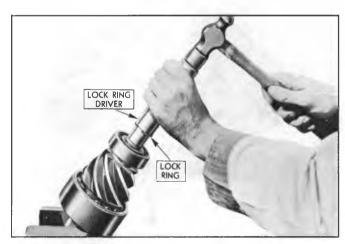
F--Pinion Rear Bearing Lock Ring Installation (11,000 Lb. Axle)
